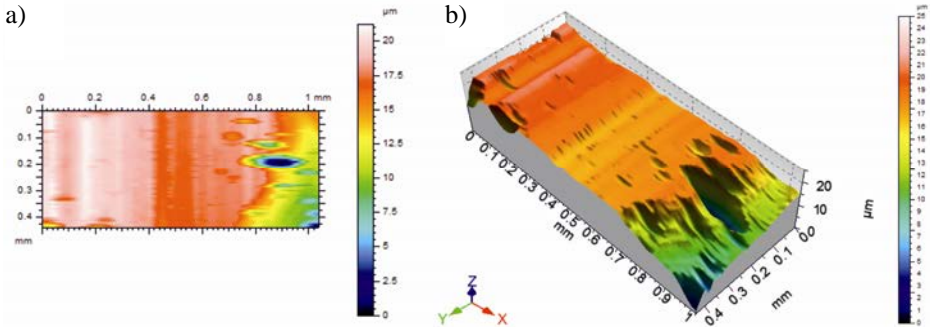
View of a surface after oscillatory burnishing at  $\phi = 45^\circ$ : a – after burnishing; b – after wear over a friction path of 20 000 m
